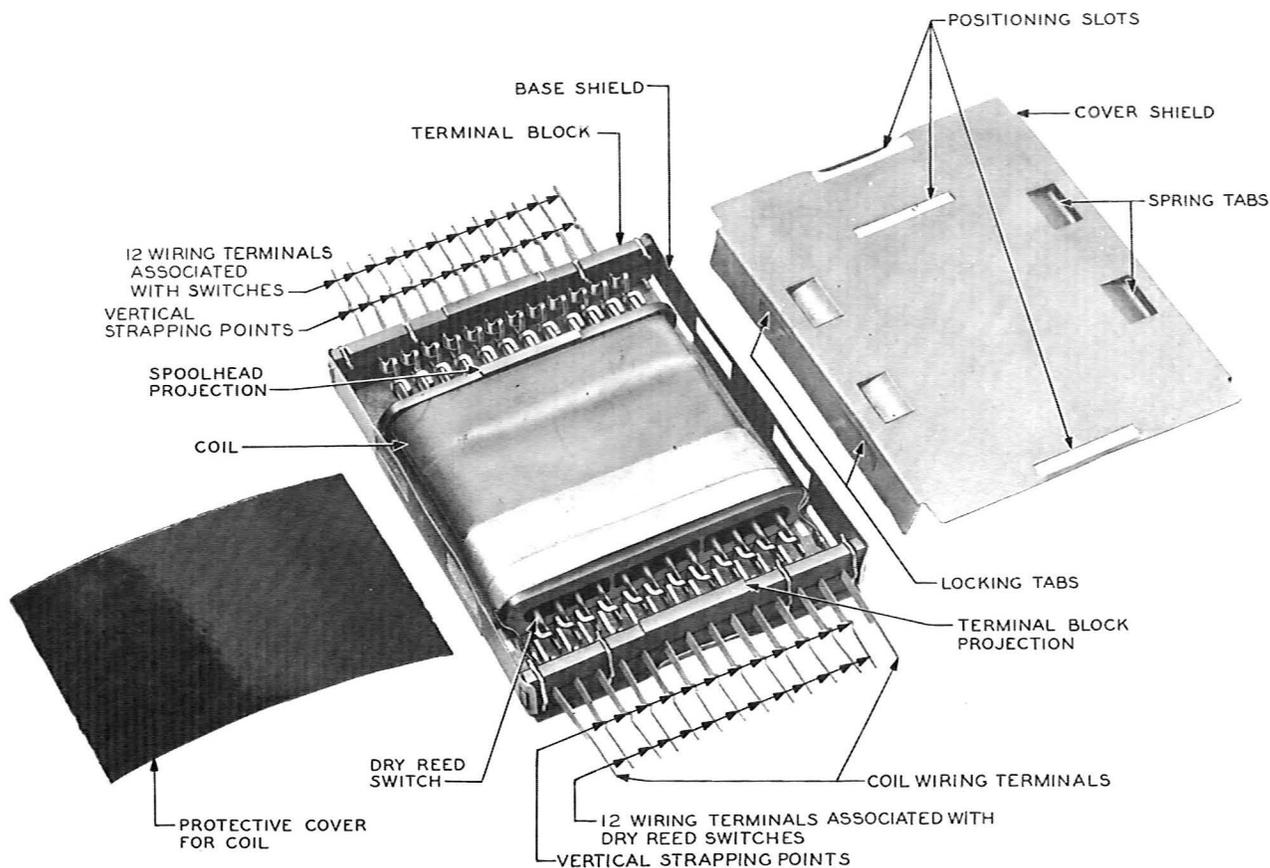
290-Type Relay With Cover and Cover Shield Removed
